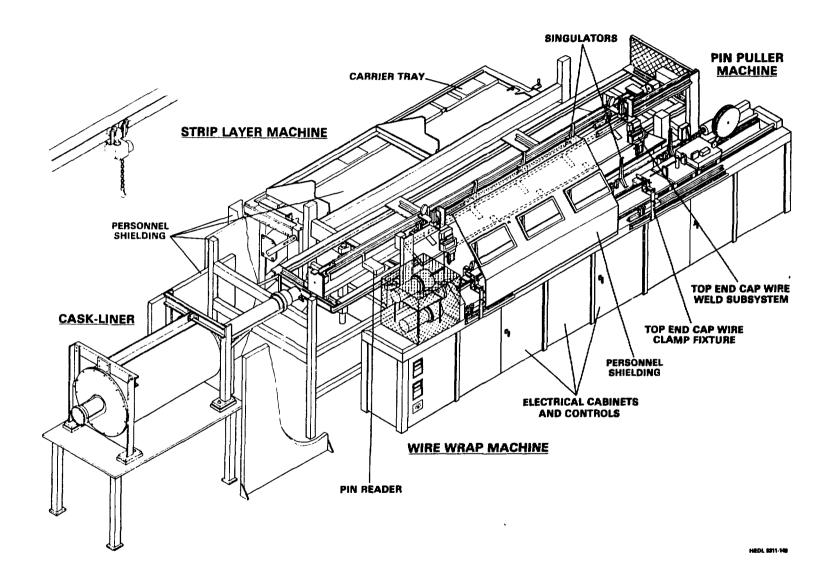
Fuel Supply Wire Wrap Strip Layer Station
